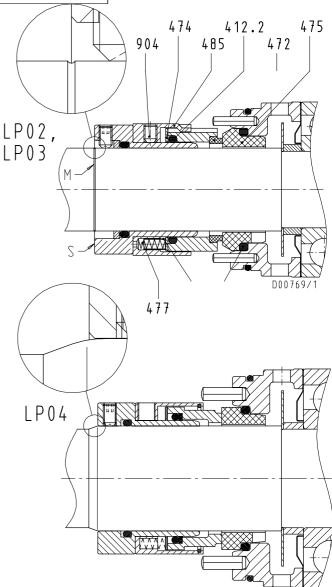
Mechanical seal M = mark on the shaft; S = face of shaft sleeve.
